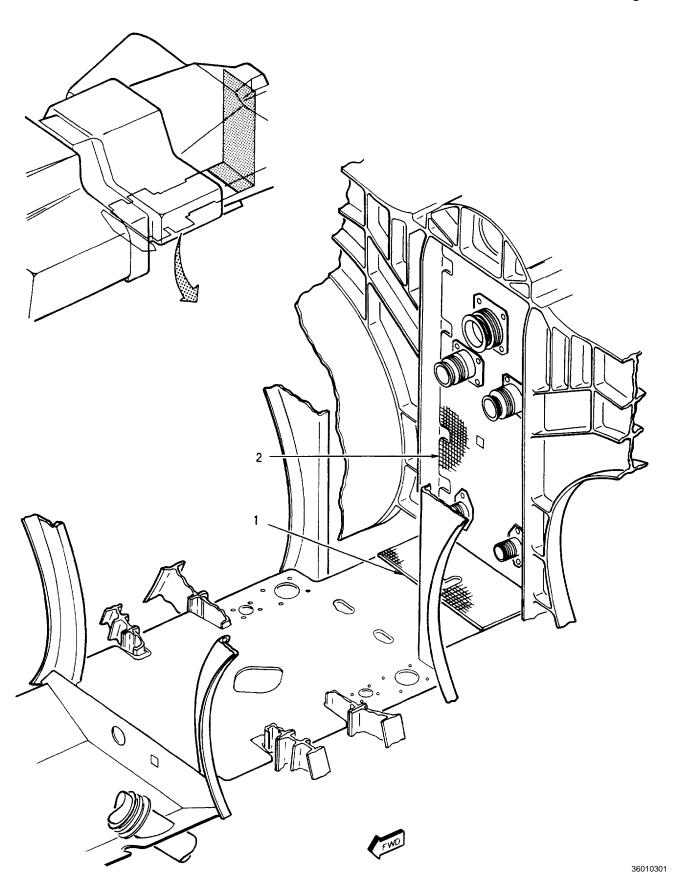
No. 4 Fuel Tank Cavity Thermal Blankets (Sheet 1)
